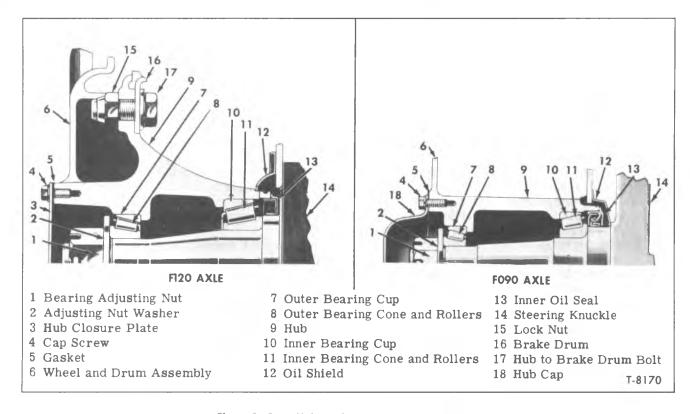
Front Hubs and Bearings (Cast Type Wheels)
